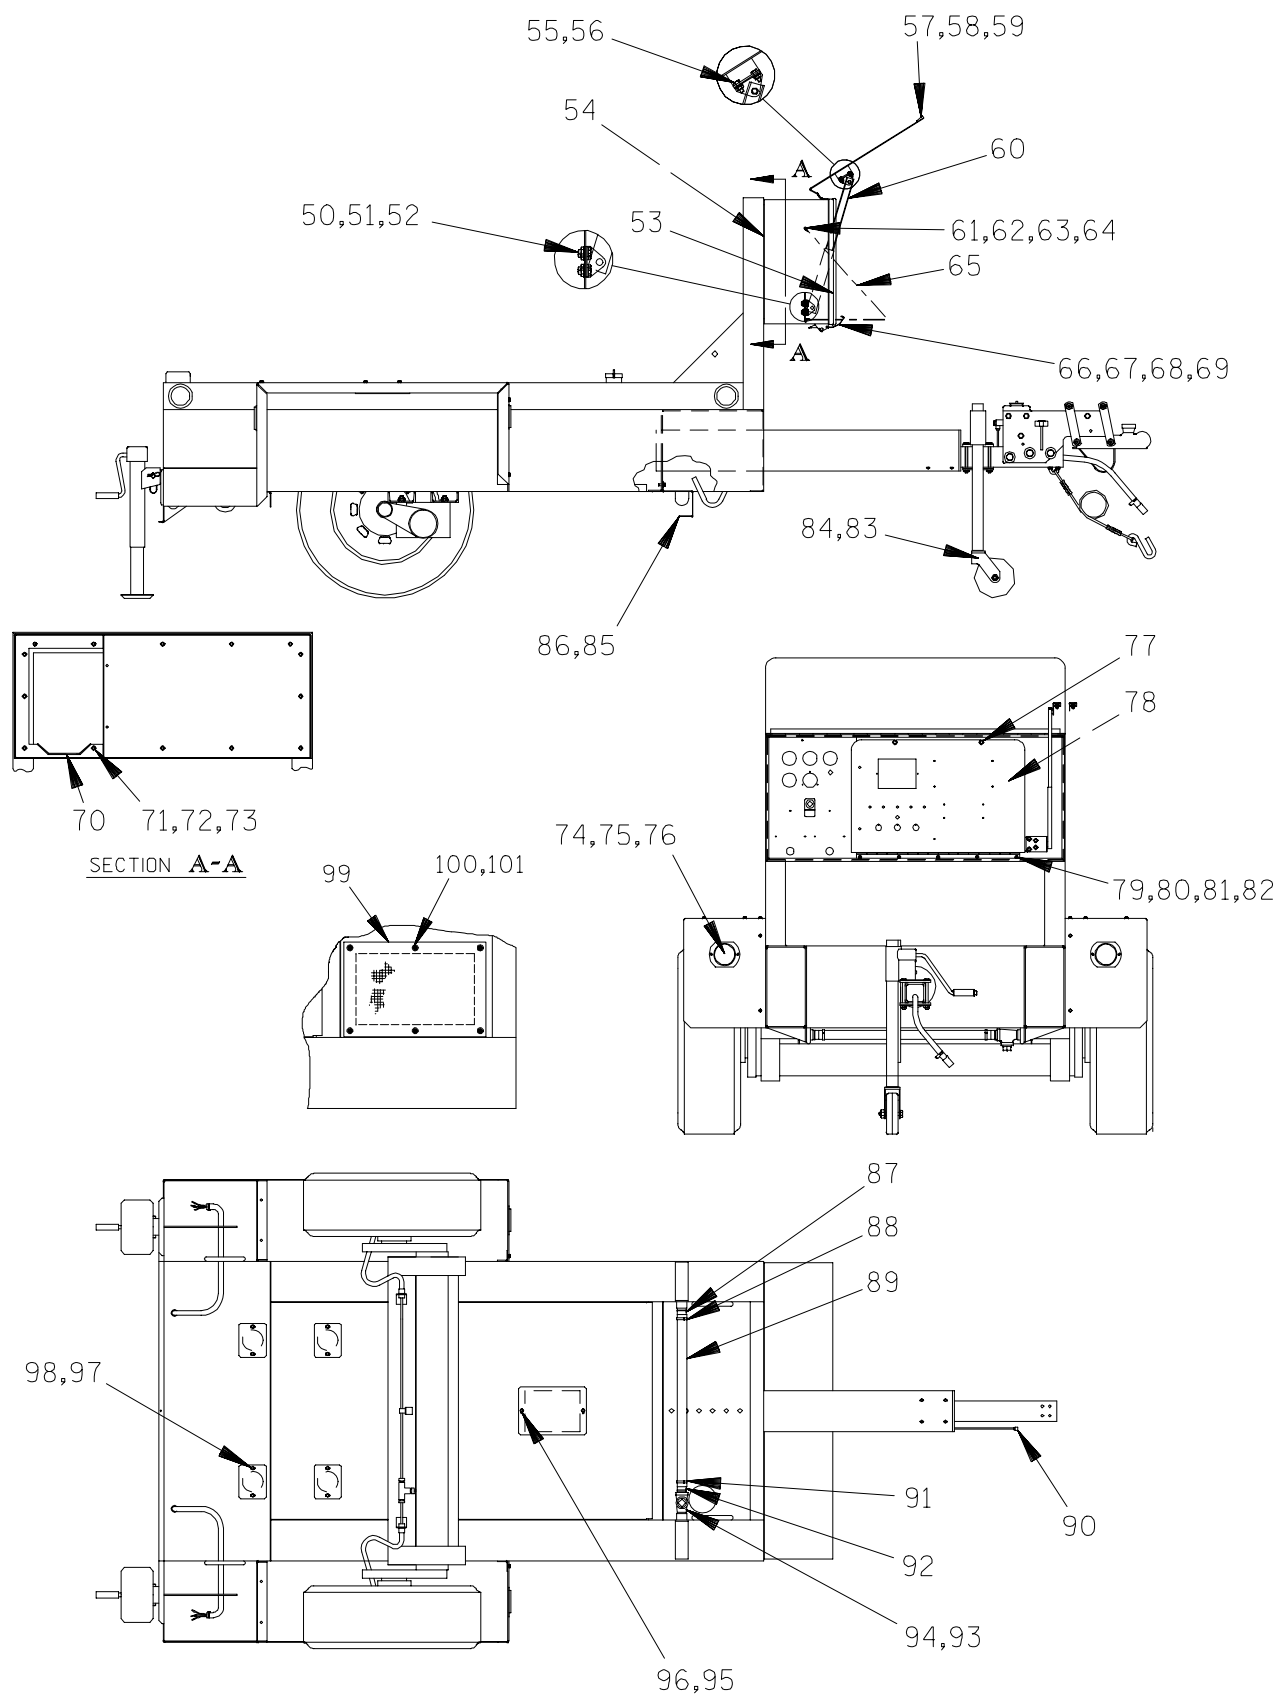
41583-747 Trailer Assembly (Cont'd)
